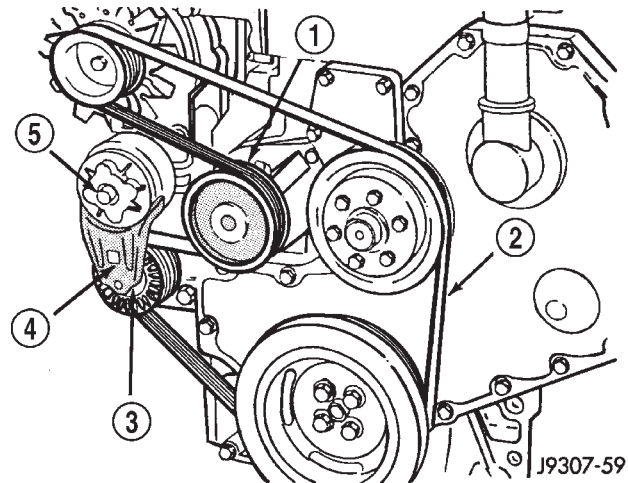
Automatic Belt Tensioner Diesel Engine—Typical
